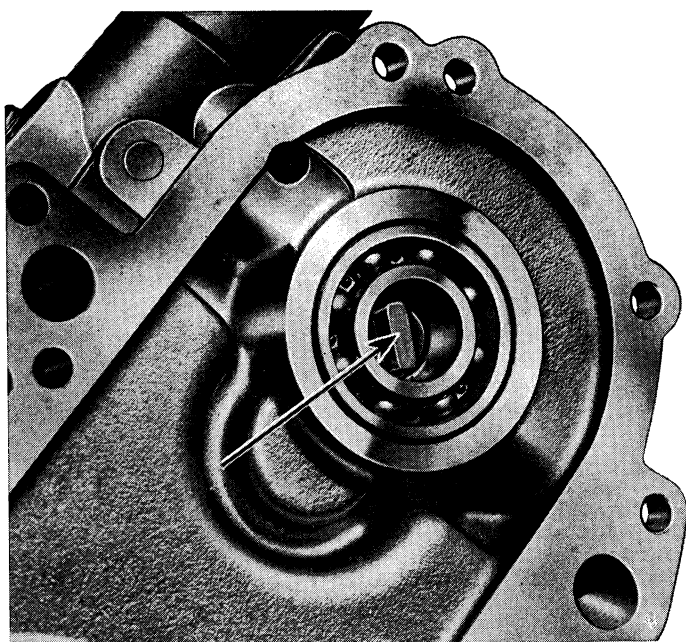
Detail of the 118 B.000 engine oil pump housing with bearing. Arrow points to the shaft drive tang.
